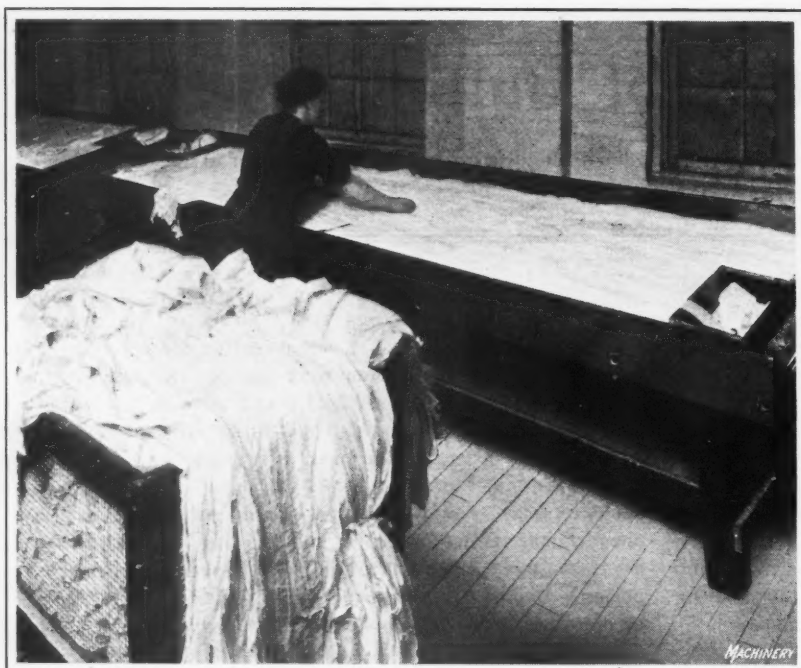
"Booking" the Strips for Pieced-sewed Buffs
